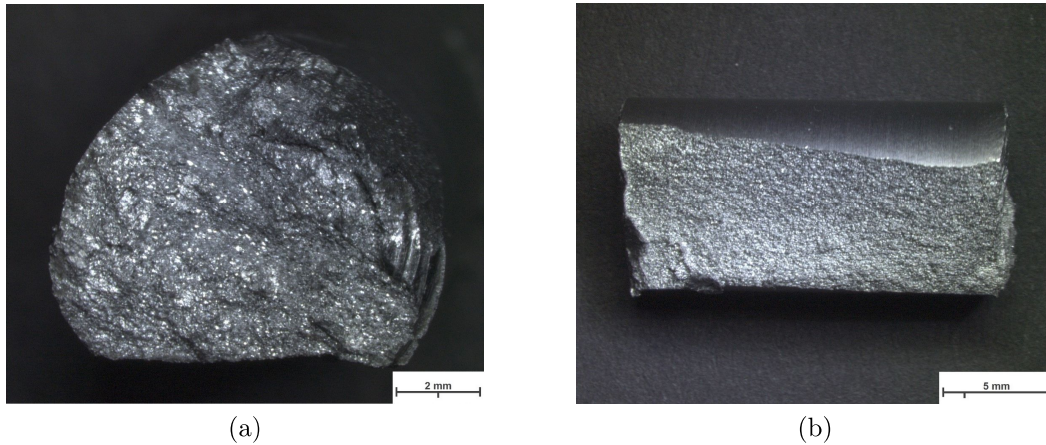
Stereomicroscopy of the (a) rotating specimen transverse fracture face [12x magnification] and (b) longitudinal fracture face [6x magnification]
